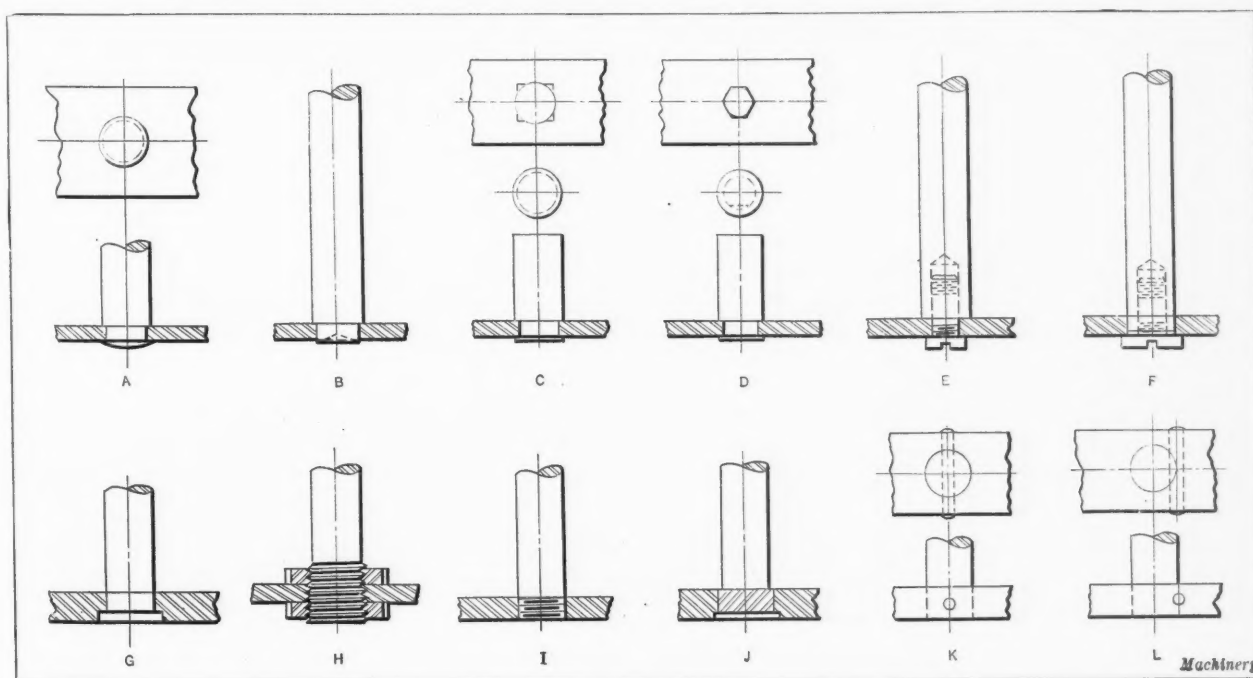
Methods of fastening Posts in Parts so that they cannot Move
